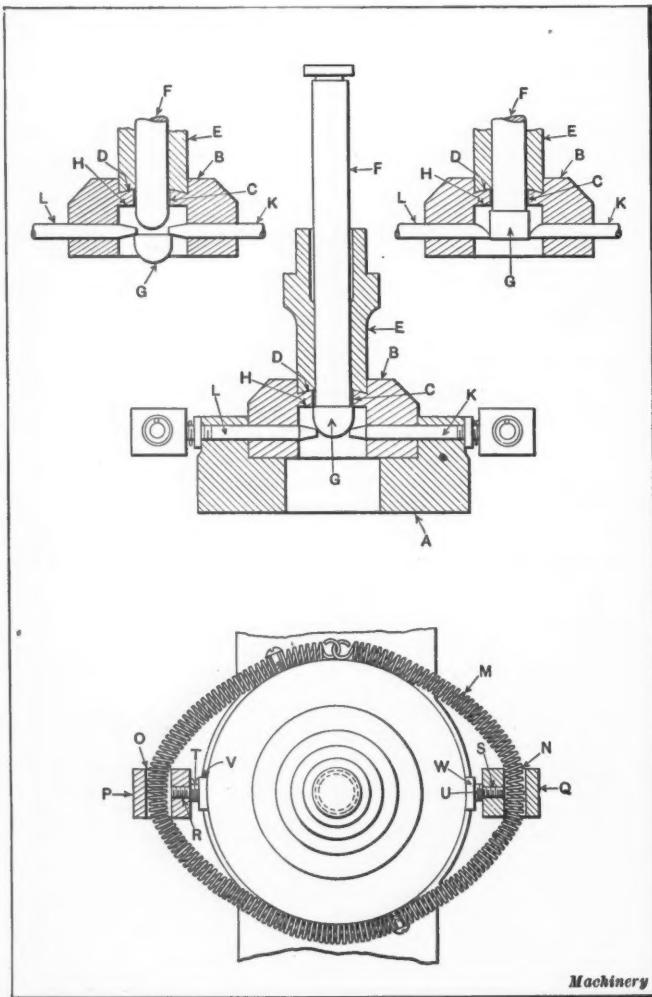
Automatic Stripper for Blanking and Forming Dies
